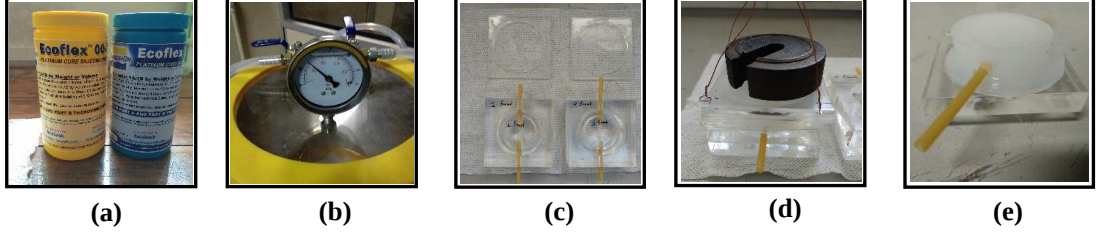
Fabrication process of PAP, (a) Ecoflex-30 silicone material, (b) vacuum chamber, (c) perspex moulds, (d) PAP assembly, (e) final fabricated PAP
